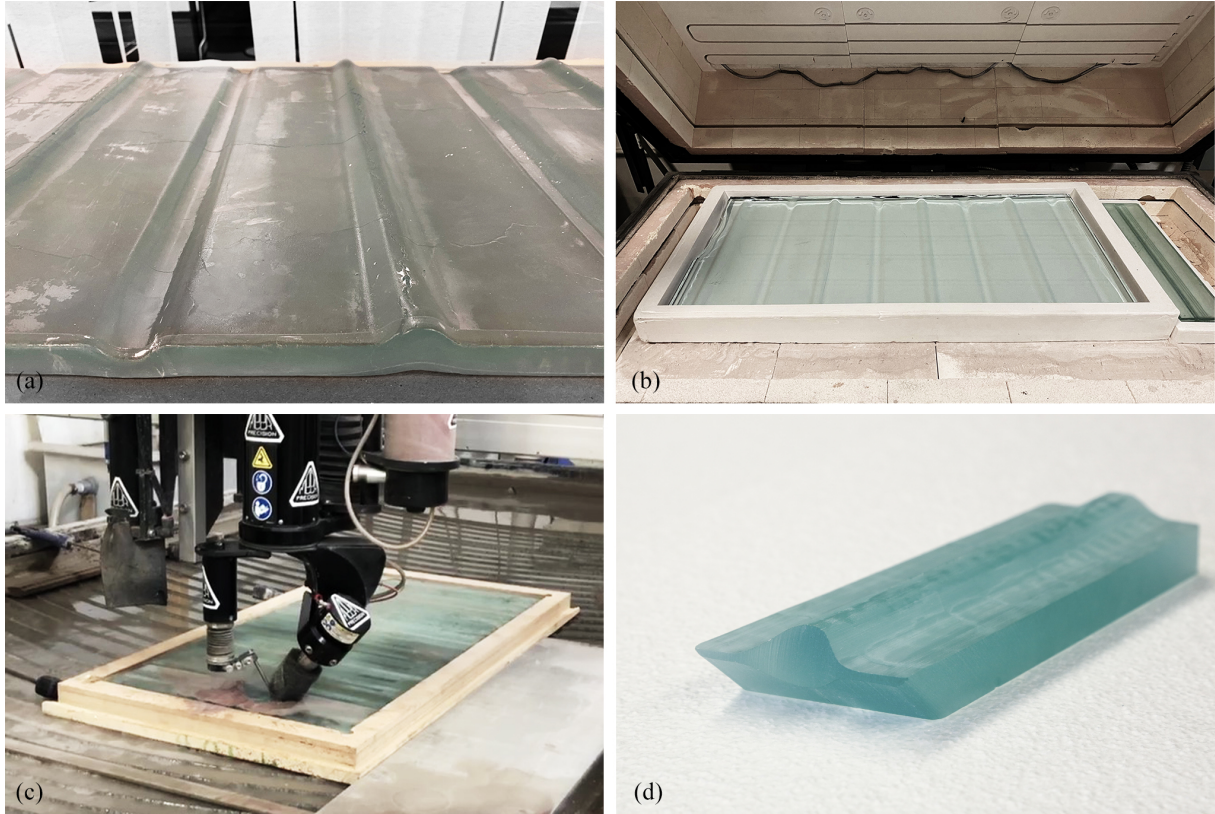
Kiln-cast glass and waterjet cutting. (a) Cast glass, (b) mold and kiln, (c) 5-axis abrasive waterjet, (d) the edge cuts of a male side plate.
